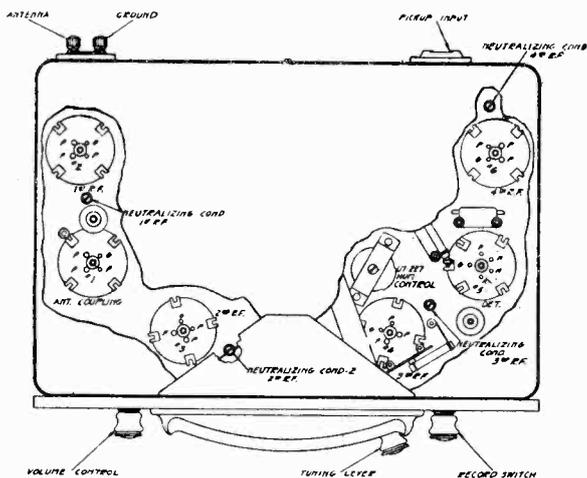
Top View of Radio, Showing Radiotron Sockets
